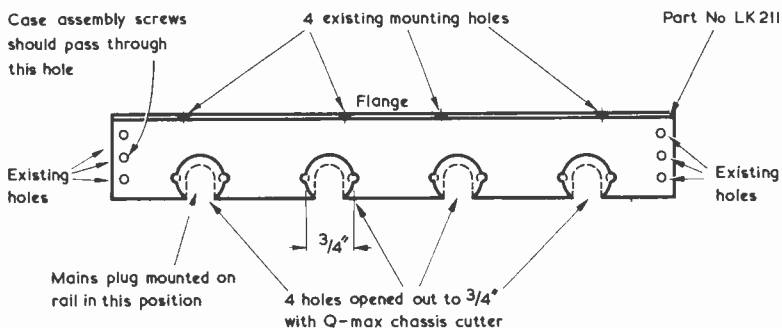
Modifying the rear chassis rail. The flange is towards the reader
